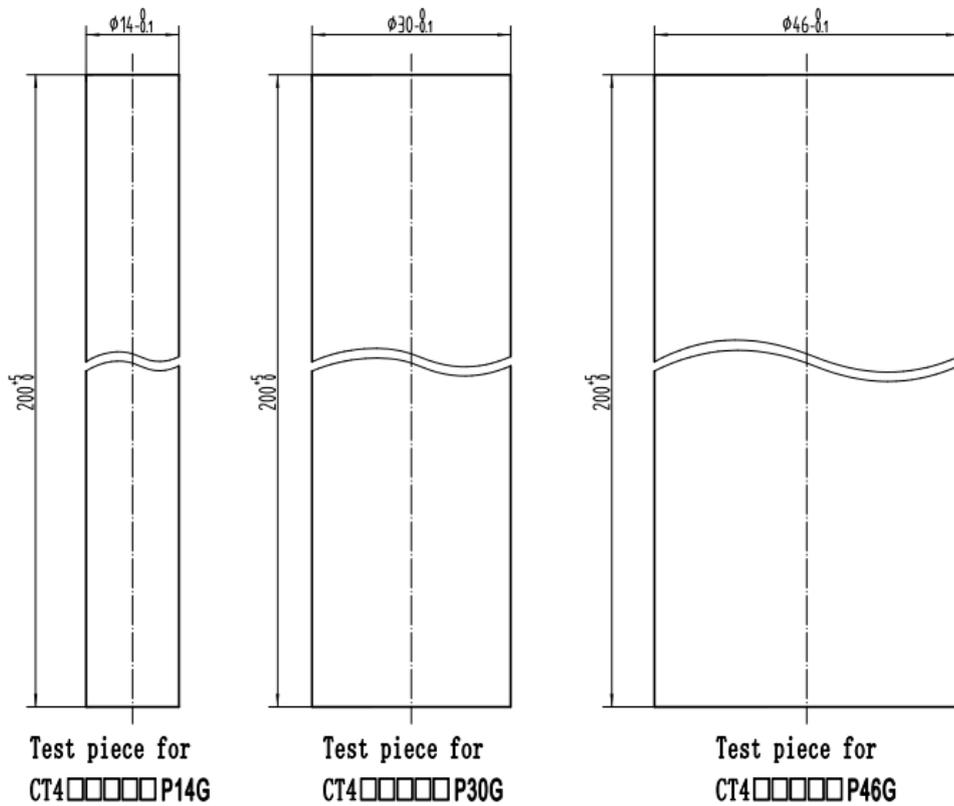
Specimen Specification Diagram (Unit: mm)
